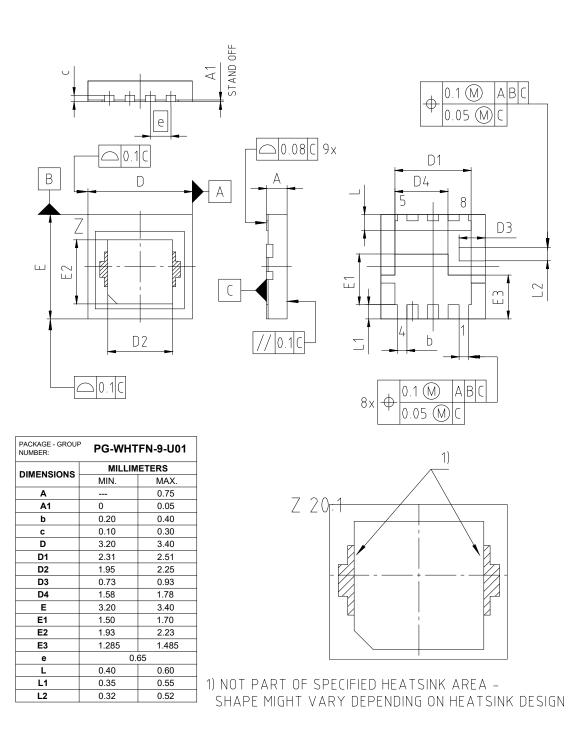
Outline PG-WHTFN-9, dimensions in mm
